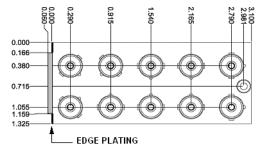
DFR-8310 Rear Module — Physical Dimensions
